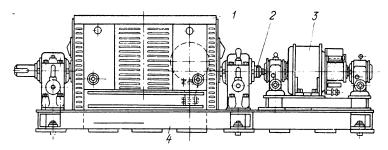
Synchronous motor, Series СДБ i — motor; i — flexible coupling; i — exciter; i — bed plate
